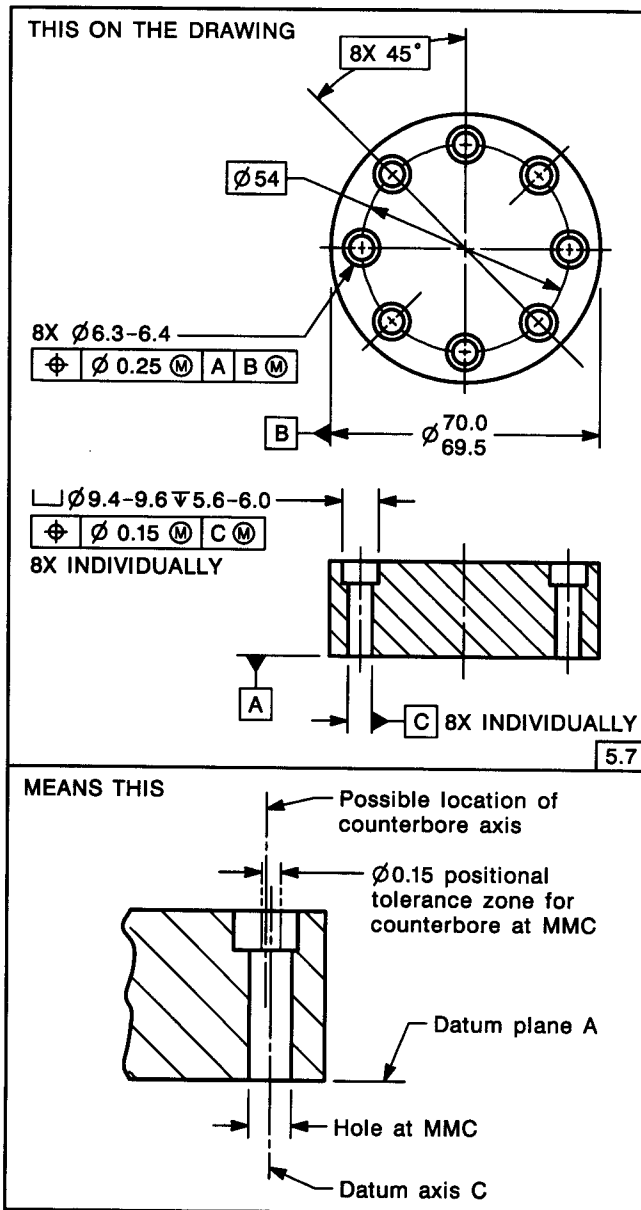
POSITIONAL TOLERANCES FOR HOLES AND COUNTERBORES, DIFFERENT DATUM REFERENCES
